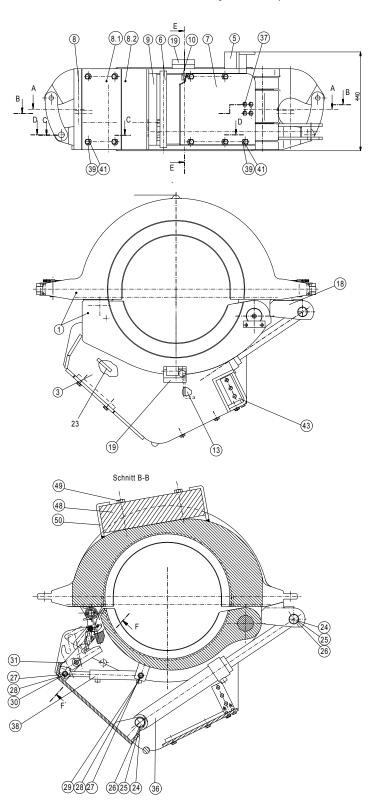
643560-Y-BC-H SDS 350-4 Hydraulic operated side door elevator I
